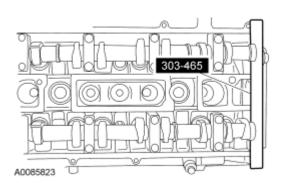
Identifying Special Camshaft Tool (303-465) Courtesy of FORD MOTOR CO.
